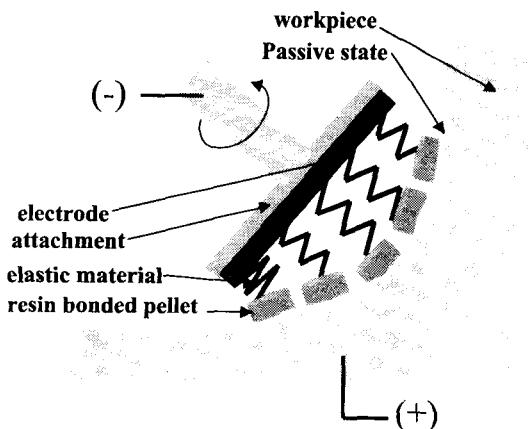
Concept of die finishing using conductive elastic finishing tool
